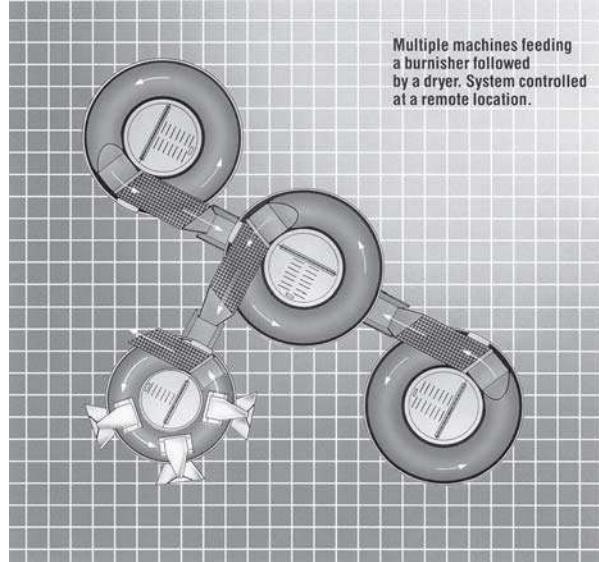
Two bowl machines feed a bowl burnisher followed by a corncob dryer (courtesy: Hammond Roto-Finish)
